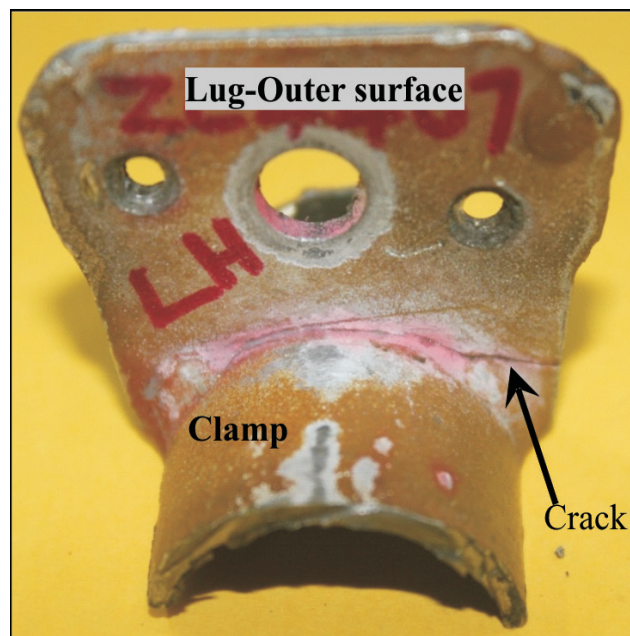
Crack as seen in the lug-clamp weldment
